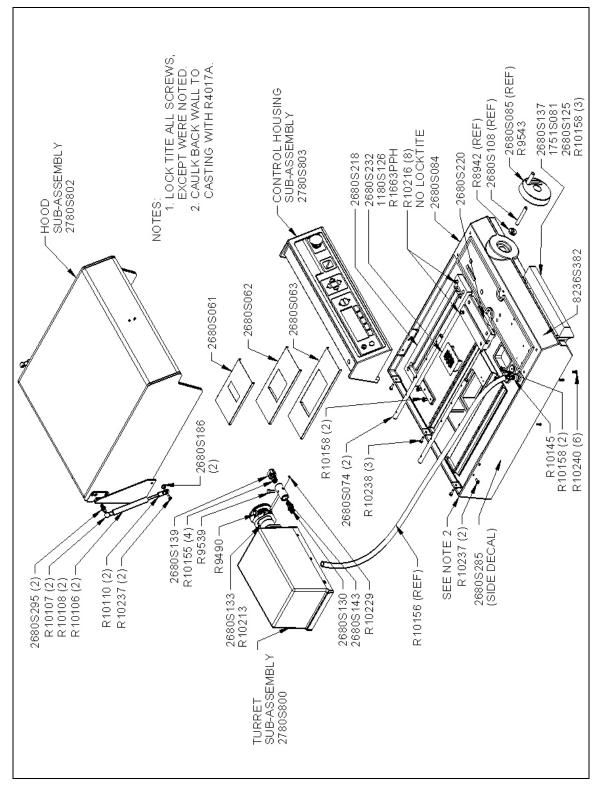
IsoMet 5000 Top View of Assembly Diagram (2780900B)
